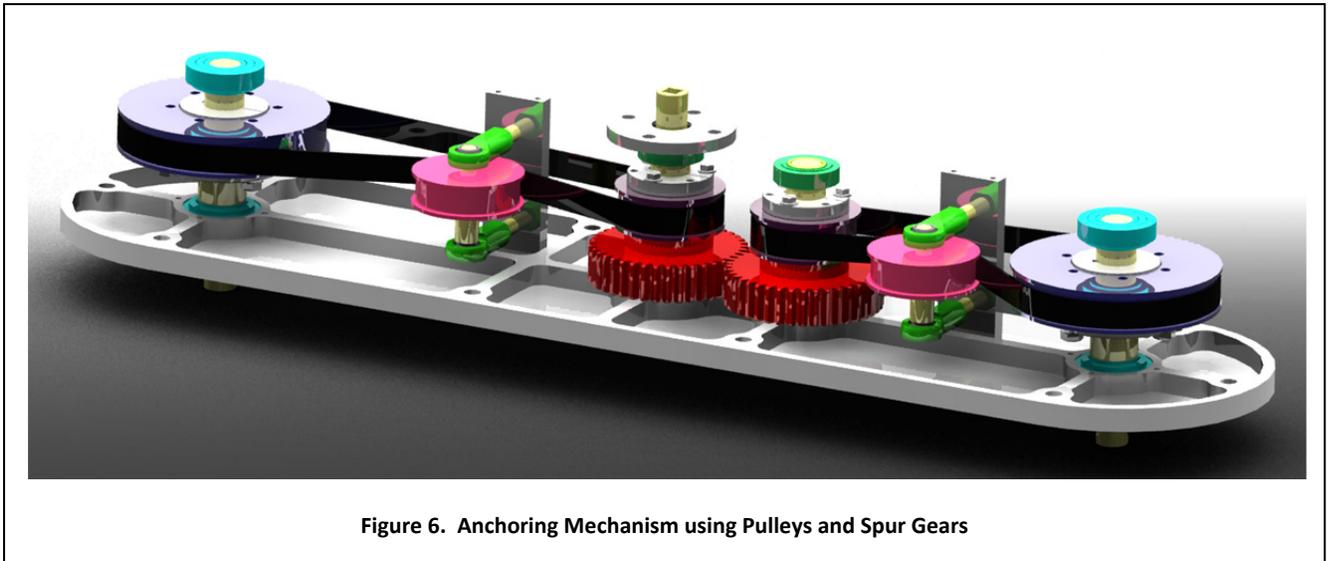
Anchoring Mechanism using Pulleys and Spur Gears
